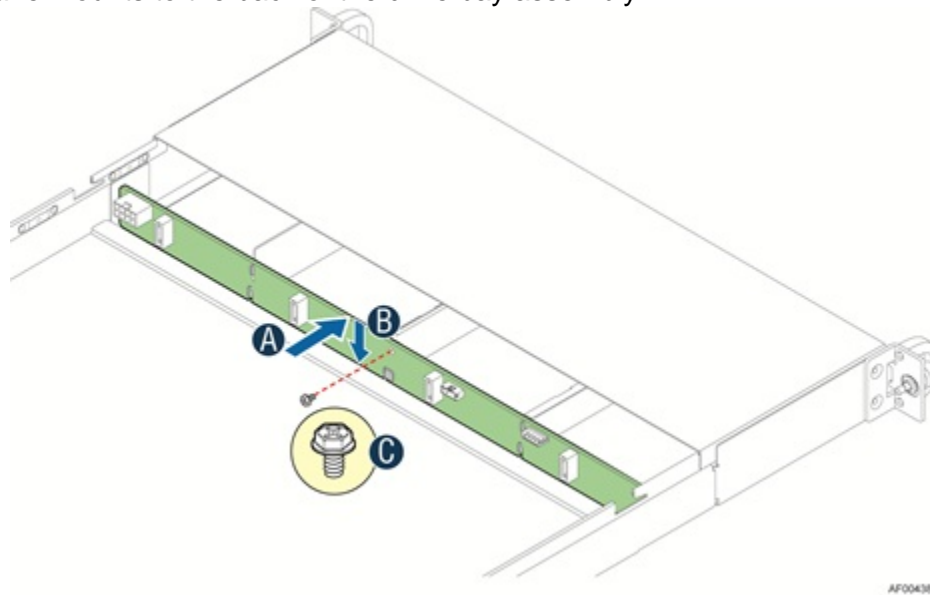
3.5" Drive Hot-Swap Backplane Installation
